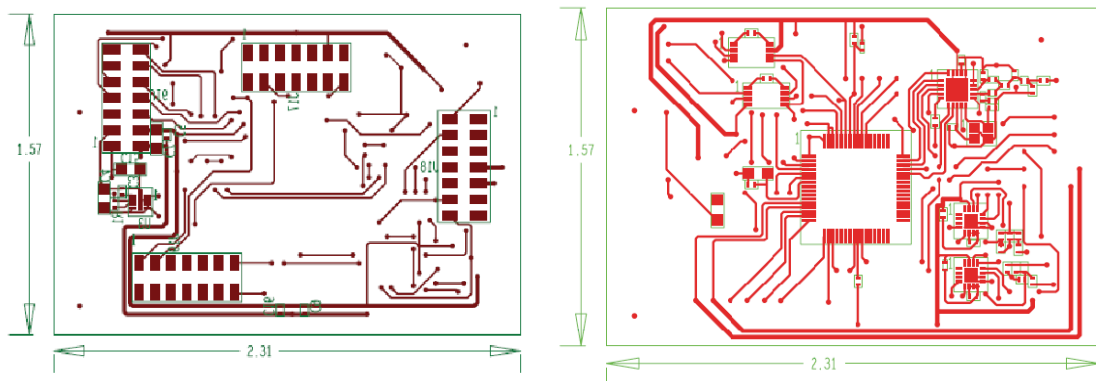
PCB layout of the bottom and top sides of the DualMed v1.00 board.
